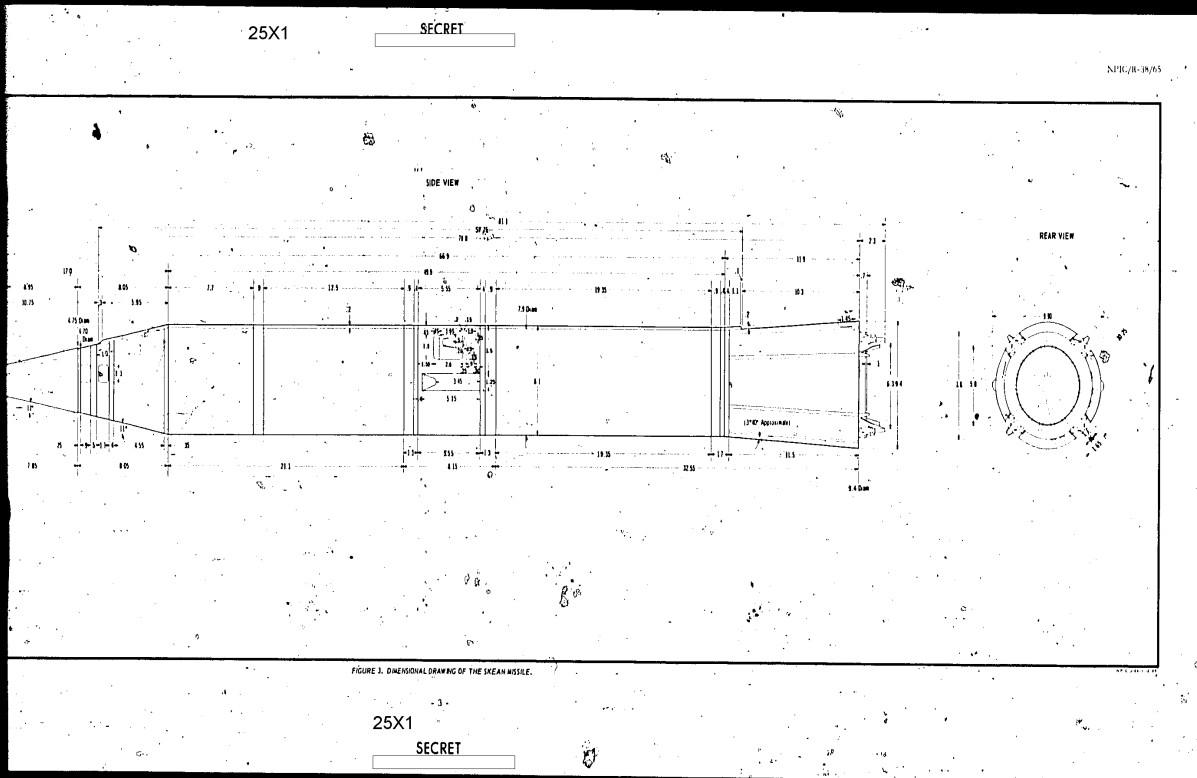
DIMENSIONAL DRAWING OF THE SKEAN MISSILE.
